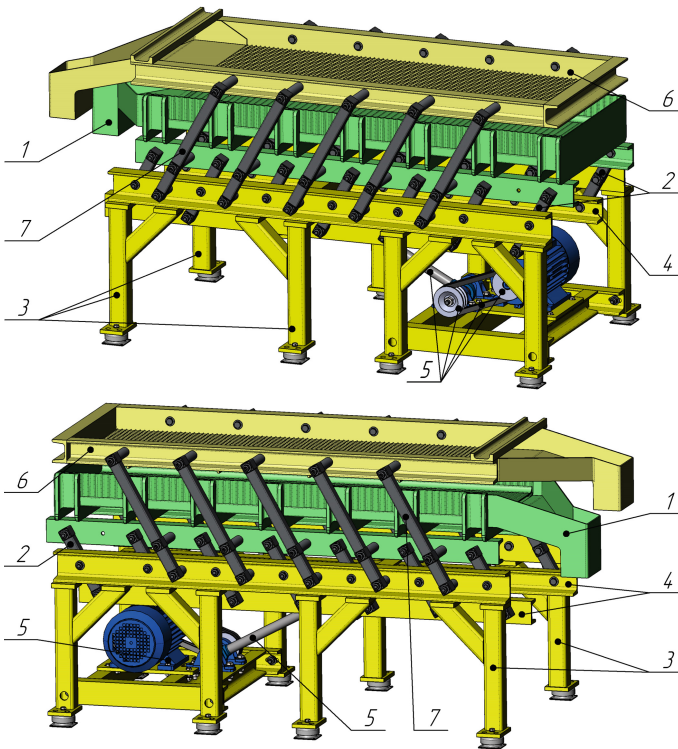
The proposed design of the shaking conveyor-separator: 1 – conveying tray; 2, 7 – oscillating rods (rockers); 3 – machine’s body; 4 – movable frame; 5 – driving crank mechanism; 6 – separating screen.
